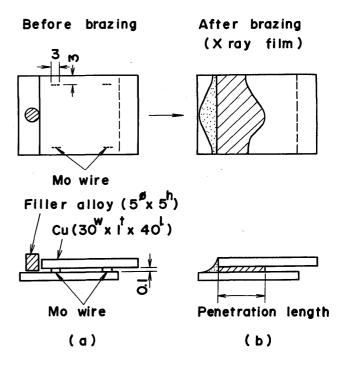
Shape and size of penetration test specimen (a) and definition of penetration length (b)
